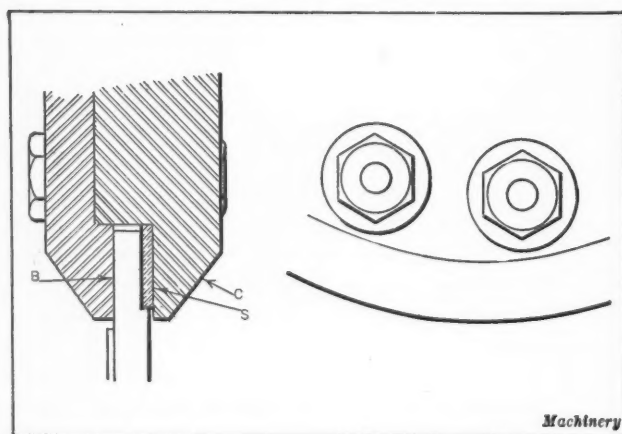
Cross-section of Winding Rolls on Machine Shown in Fig. 2
